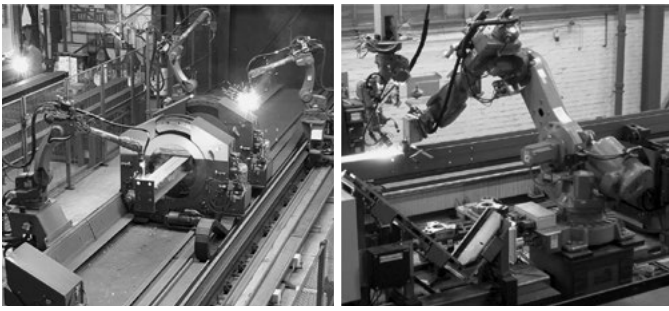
Automated production line with three welding robots a) and one welding- and one handling robot b).
